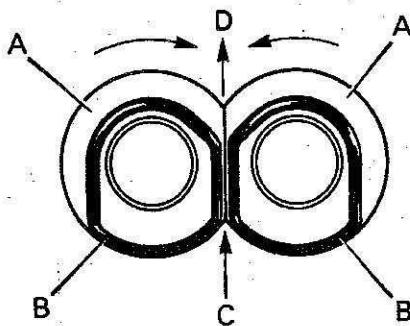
"O" ring (B) installation on late Dowty pressure balanced bearings. Bearings must be installed with pressure area (A) to outlet (D) side of pump. Inlet side of pump is (C).
